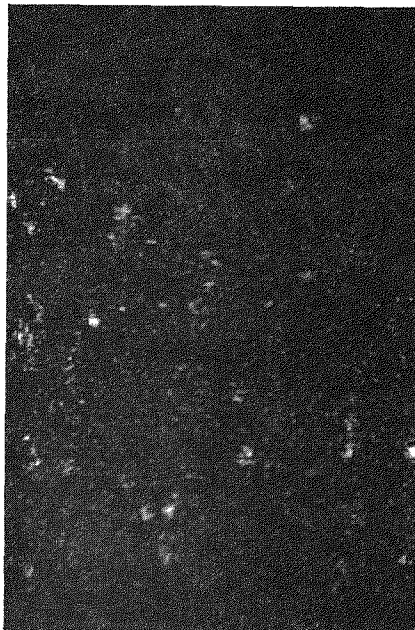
MICROPROBE ANALYSIS FOR IRON, SILICON, CHROMIUM AND COPPER IN THE FILLER PASS AREA OF A 6061 WELDMENT WITH 4643 FILLER ADDITION 250 X
